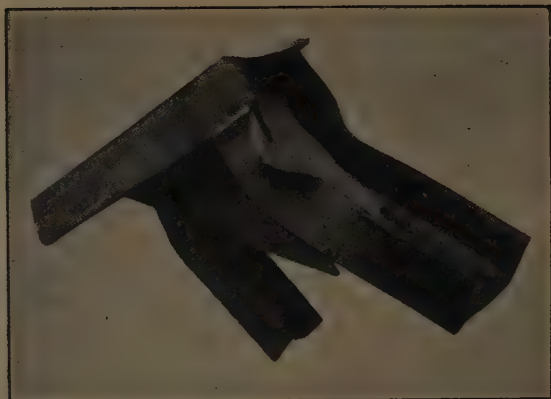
Welded solebar, headstock and diagonal after drop test.
